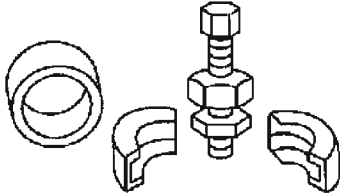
Installing Teflon(R) Seal Using Special Tool
